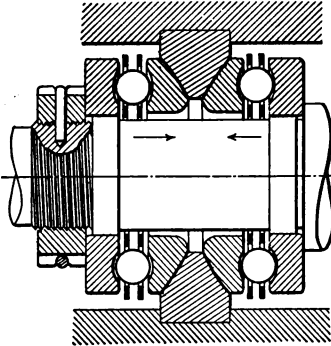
Thrust Load in Two Directions on Two Collar Bearings
